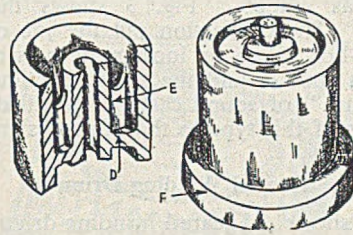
New Design of V-belt Pulley, with the Web (D) located towards One End and Brackets (E) arranged for support purposes.
